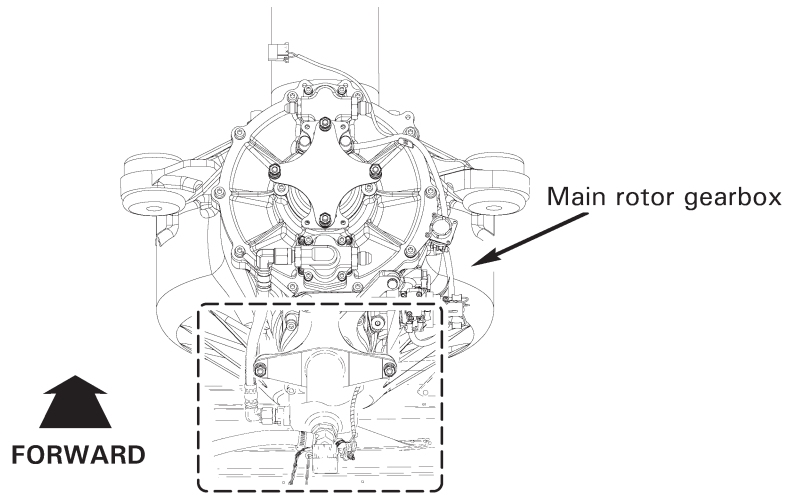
DRAINING MAIN ROTOR GEARBOX OIL
